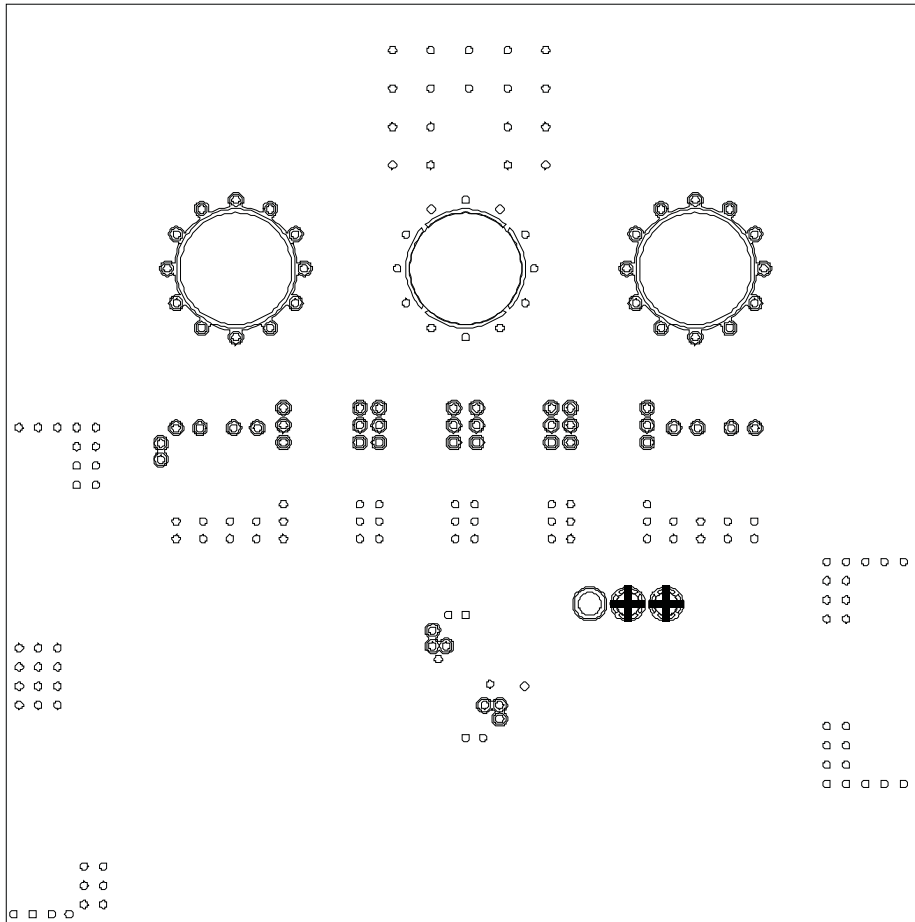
SN65LVDS4EVM Board Layout, GND – Layer 2
